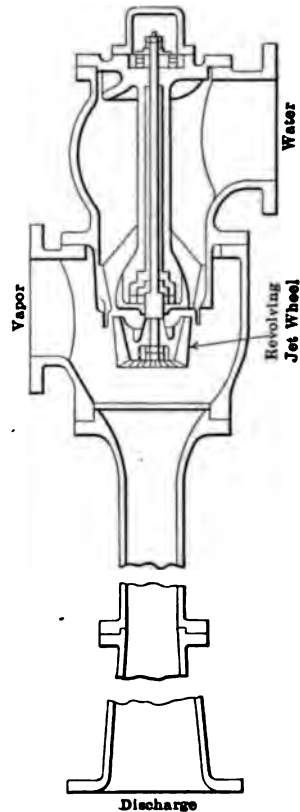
Hydraulic vacuum pump, H. R. Worthington, Inc.
